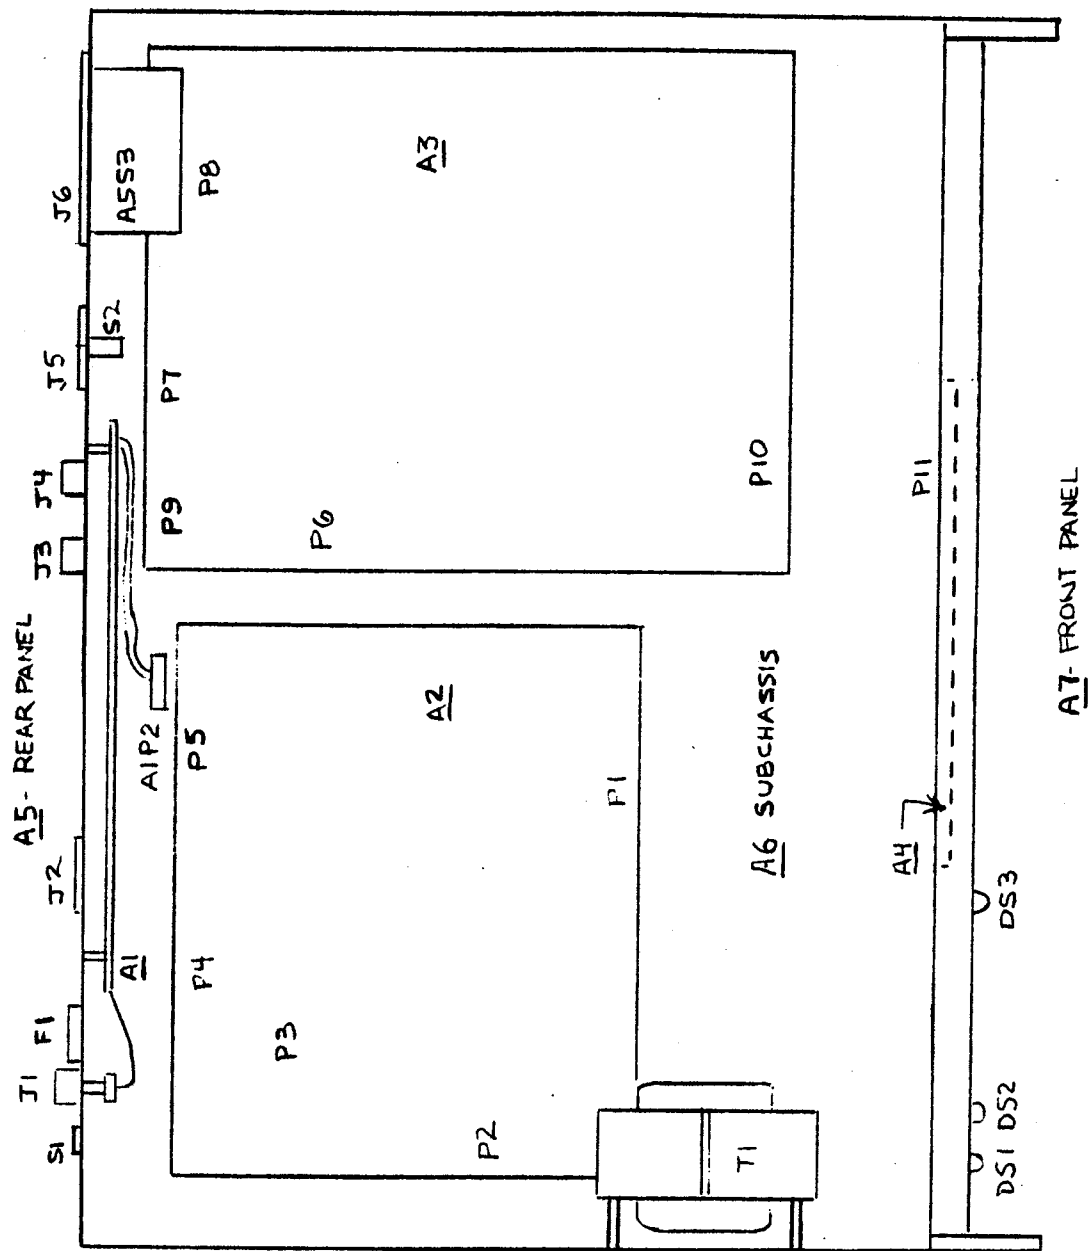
ASSEMBLY DRAWING - MAINFRAME
